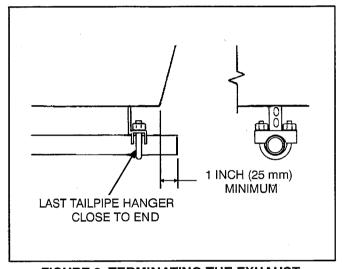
TERMINATING THE EXHAUST TAILPIPE
